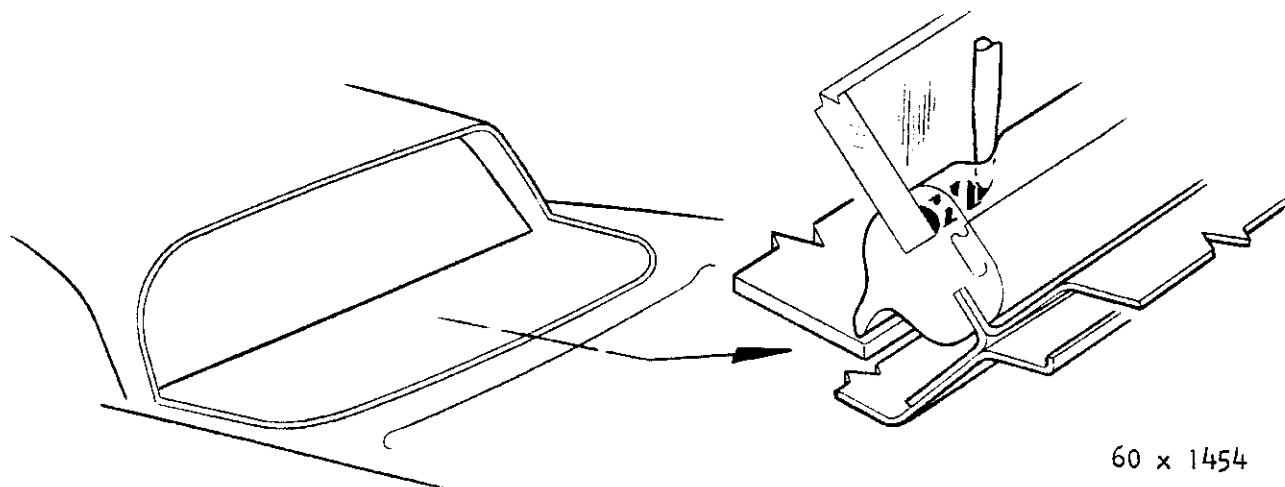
Rear Window Weatherstrip Sealing (Lower)
